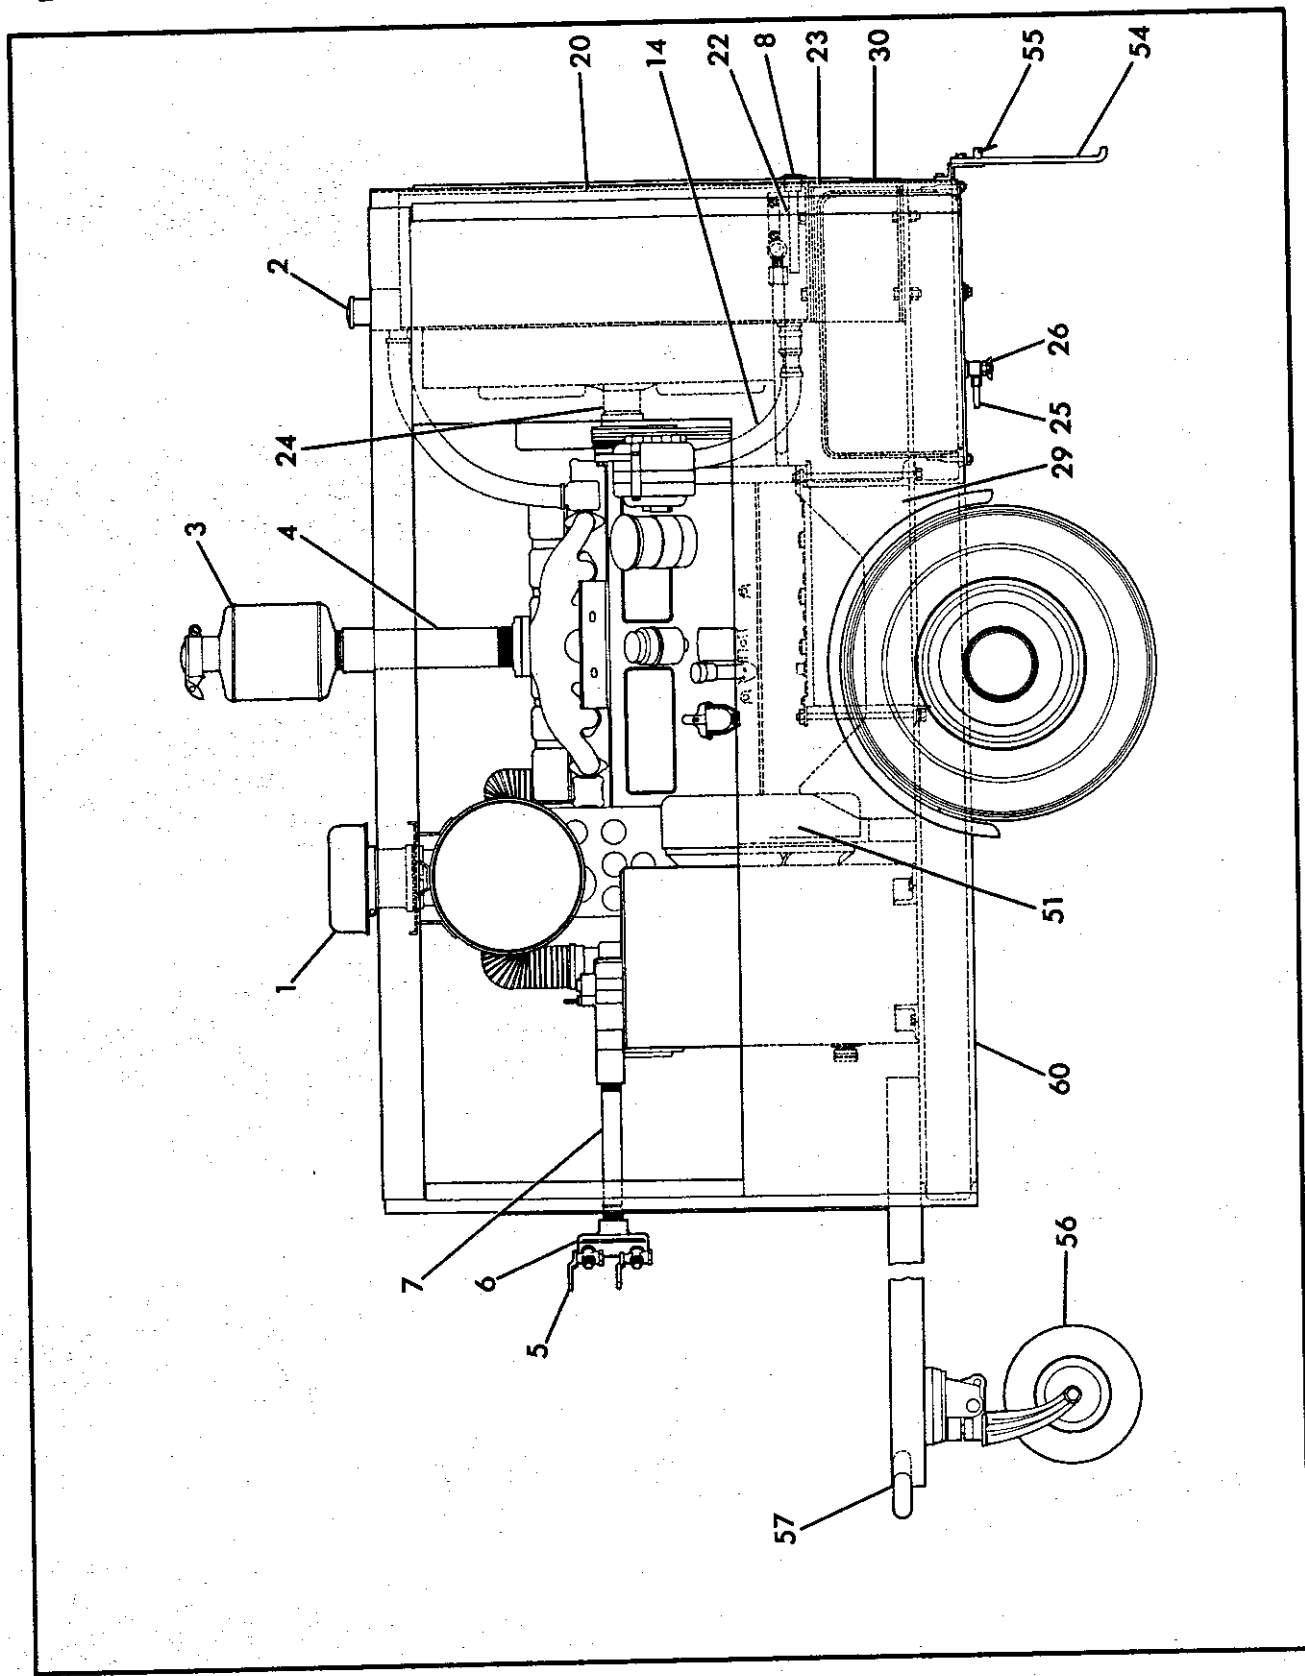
Unit Assembly (Sheet 1 of 3)
